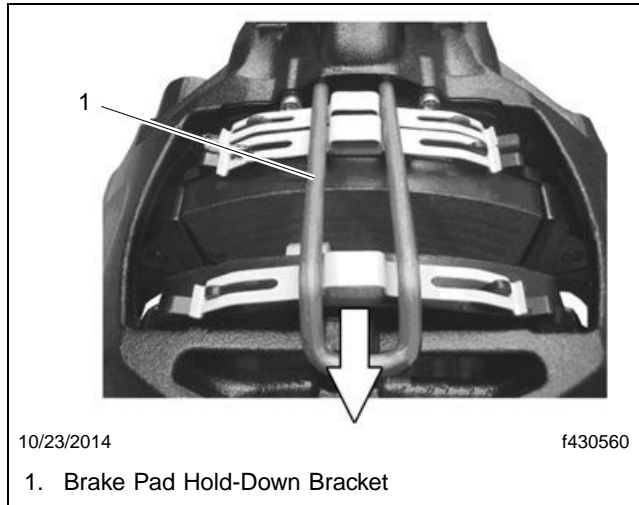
, Removing the Brake Pad Hold-Down Bracket
